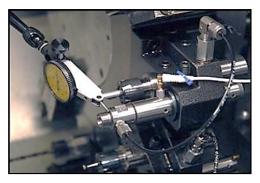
Functional test using test indicator on machine. Note the strain relief tie down for power cable.
